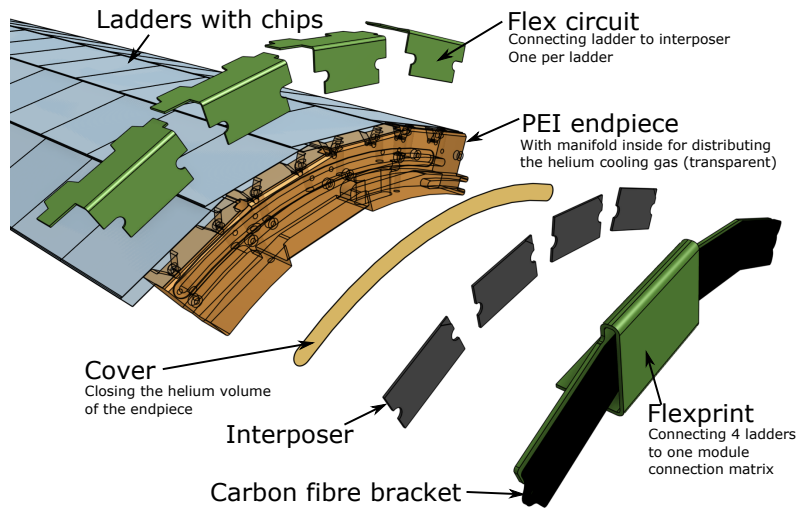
Exploded view of the outer layer module assembly. The end piece region provides a manifold for distributing the helium cooling gas and holds the flexible circuits to connect ladders to a single electrical connection matrix on the bottom.
